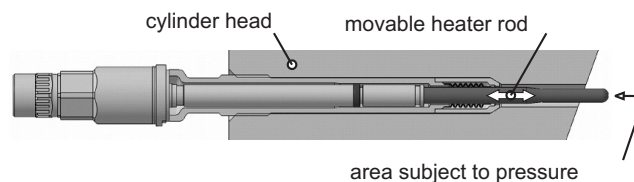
Section through the pressure sensor glow plug with movable heating rod
